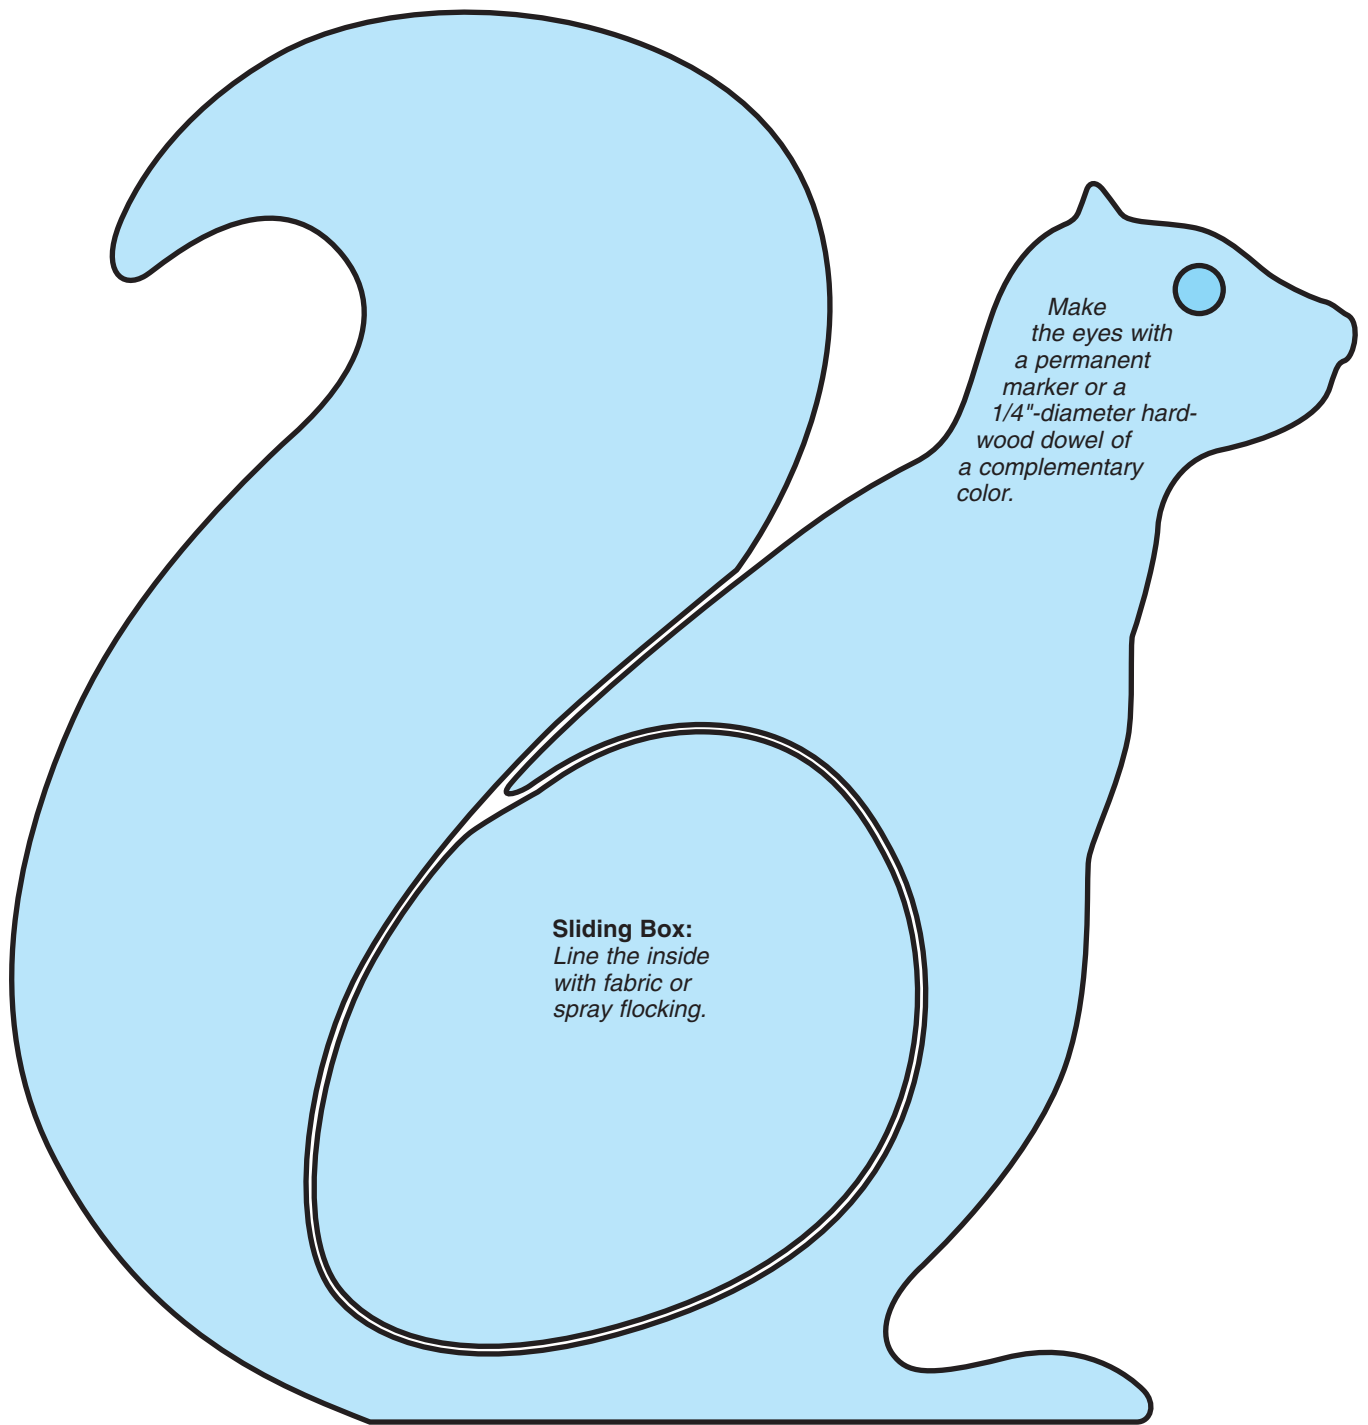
Glue the sides back onto the center section. Sand the project smooth and use a marker or 1/8" dowel of contrasting color to make the eyes. Apply an oil or clear finish. Flock the inside of the box section for a finishing touch.
